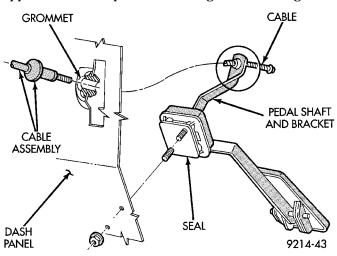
Accelerator Pedal and Throttle Cable—Front View
